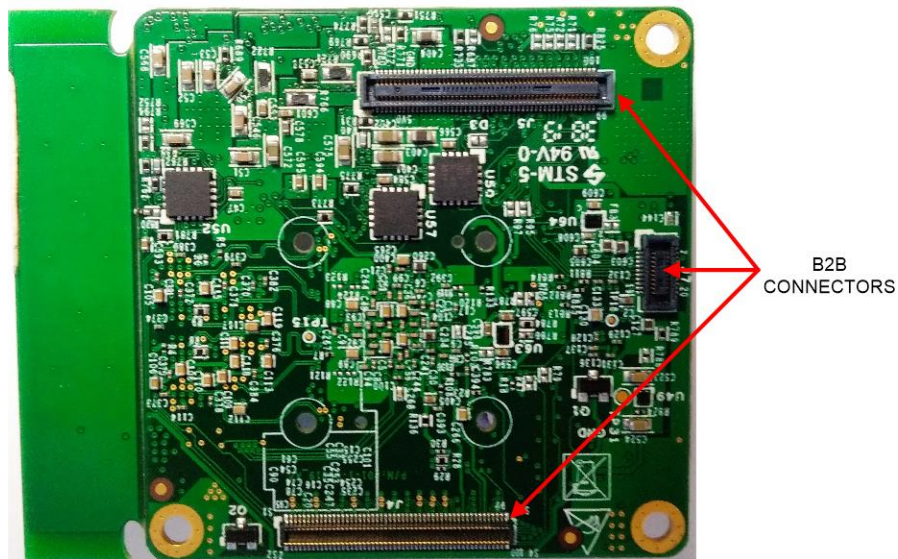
shows the bottom side of the fully assembled PCB with labels.
